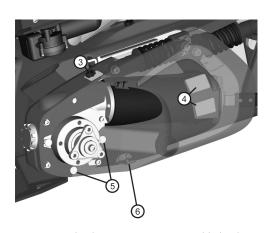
The drive motor cover is assembled with hook and loop fasteners (3-4) and a fixing point (5) at the bottom.
